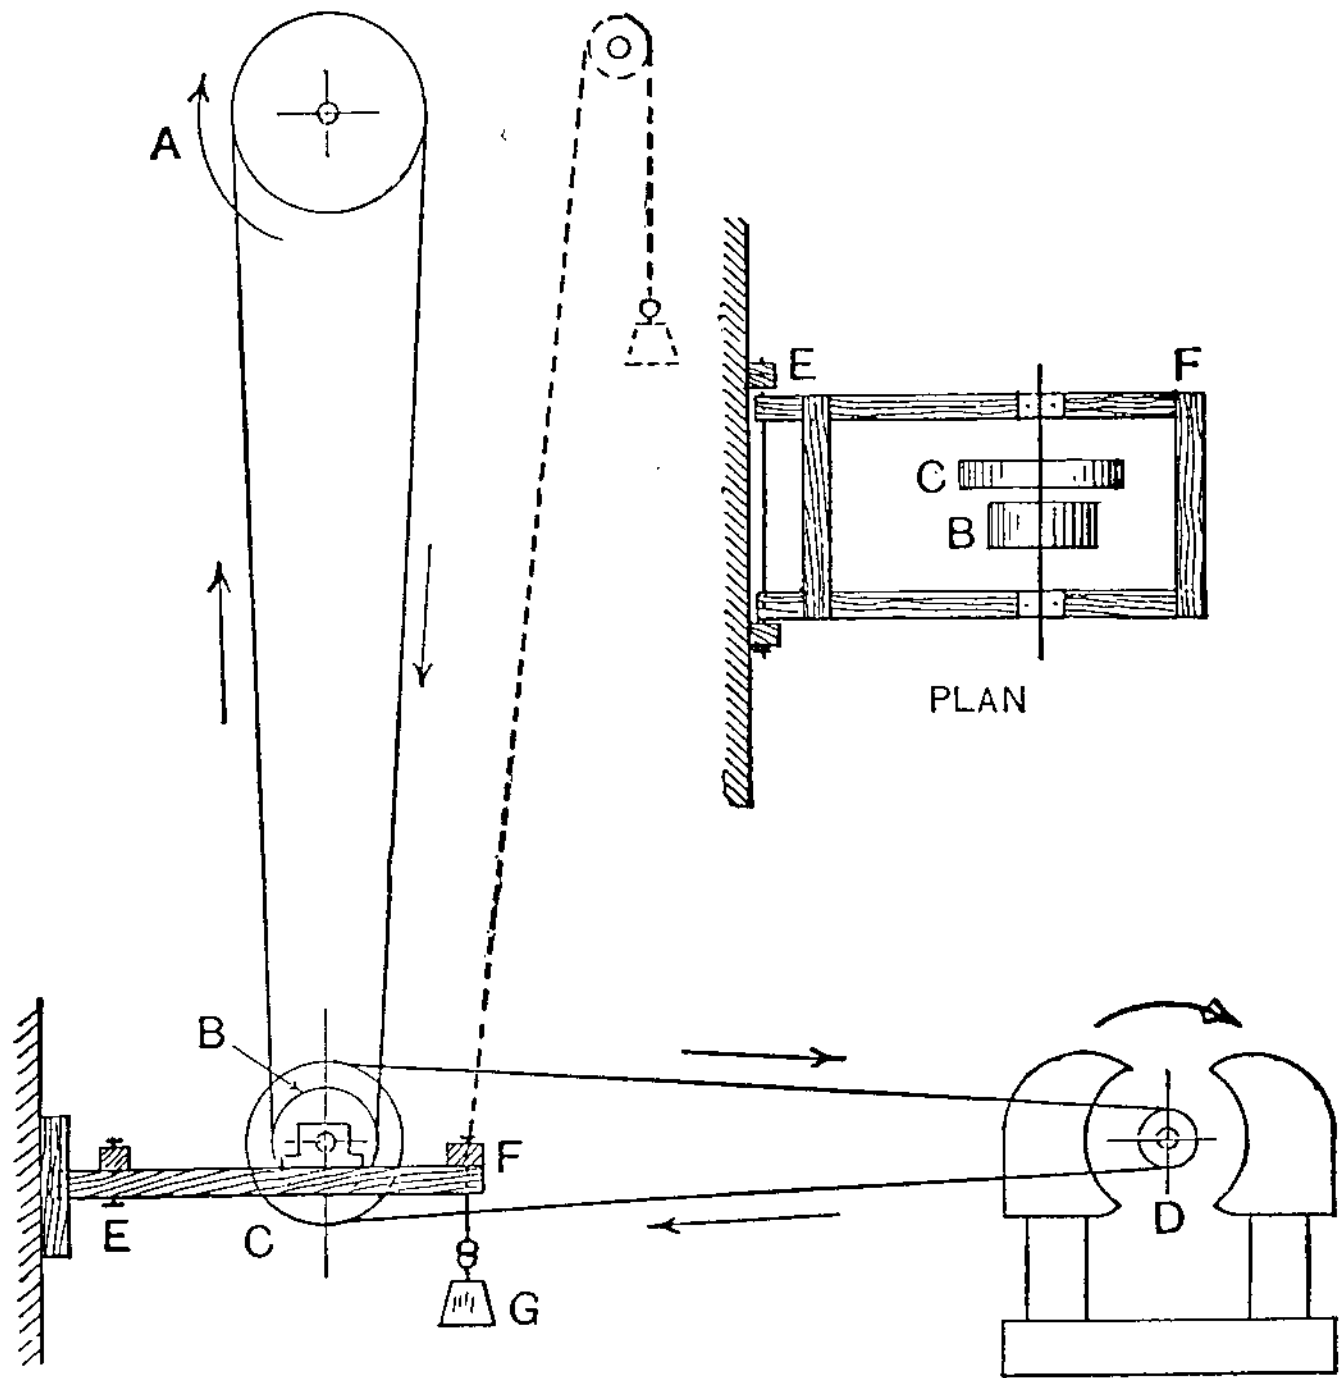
Driving Belt Arrangement for Wind Electrical Plant.
